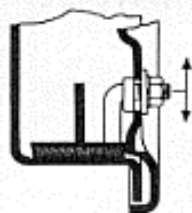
C—If a shoe stop is used it will be at lower end of backing plate as shown above
